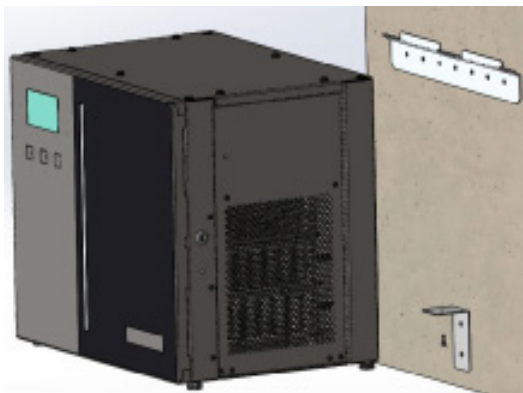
Charger, Wall, Wall-Mount Hanger, Bottom Bracket and Screw with an M5 thread
